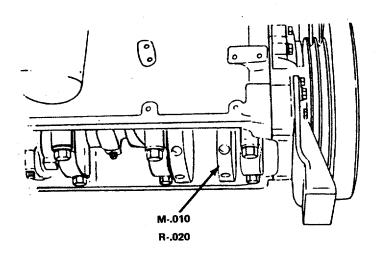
Counterweight Markings for Bearing Sizes.
